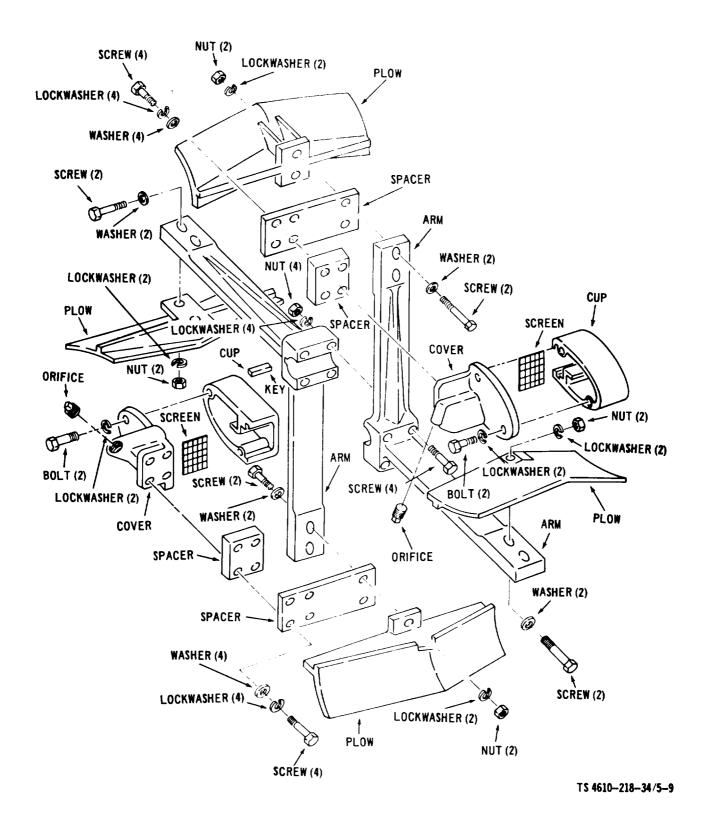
Slurry Feeder Agitators, Disassembly and Reassembly
